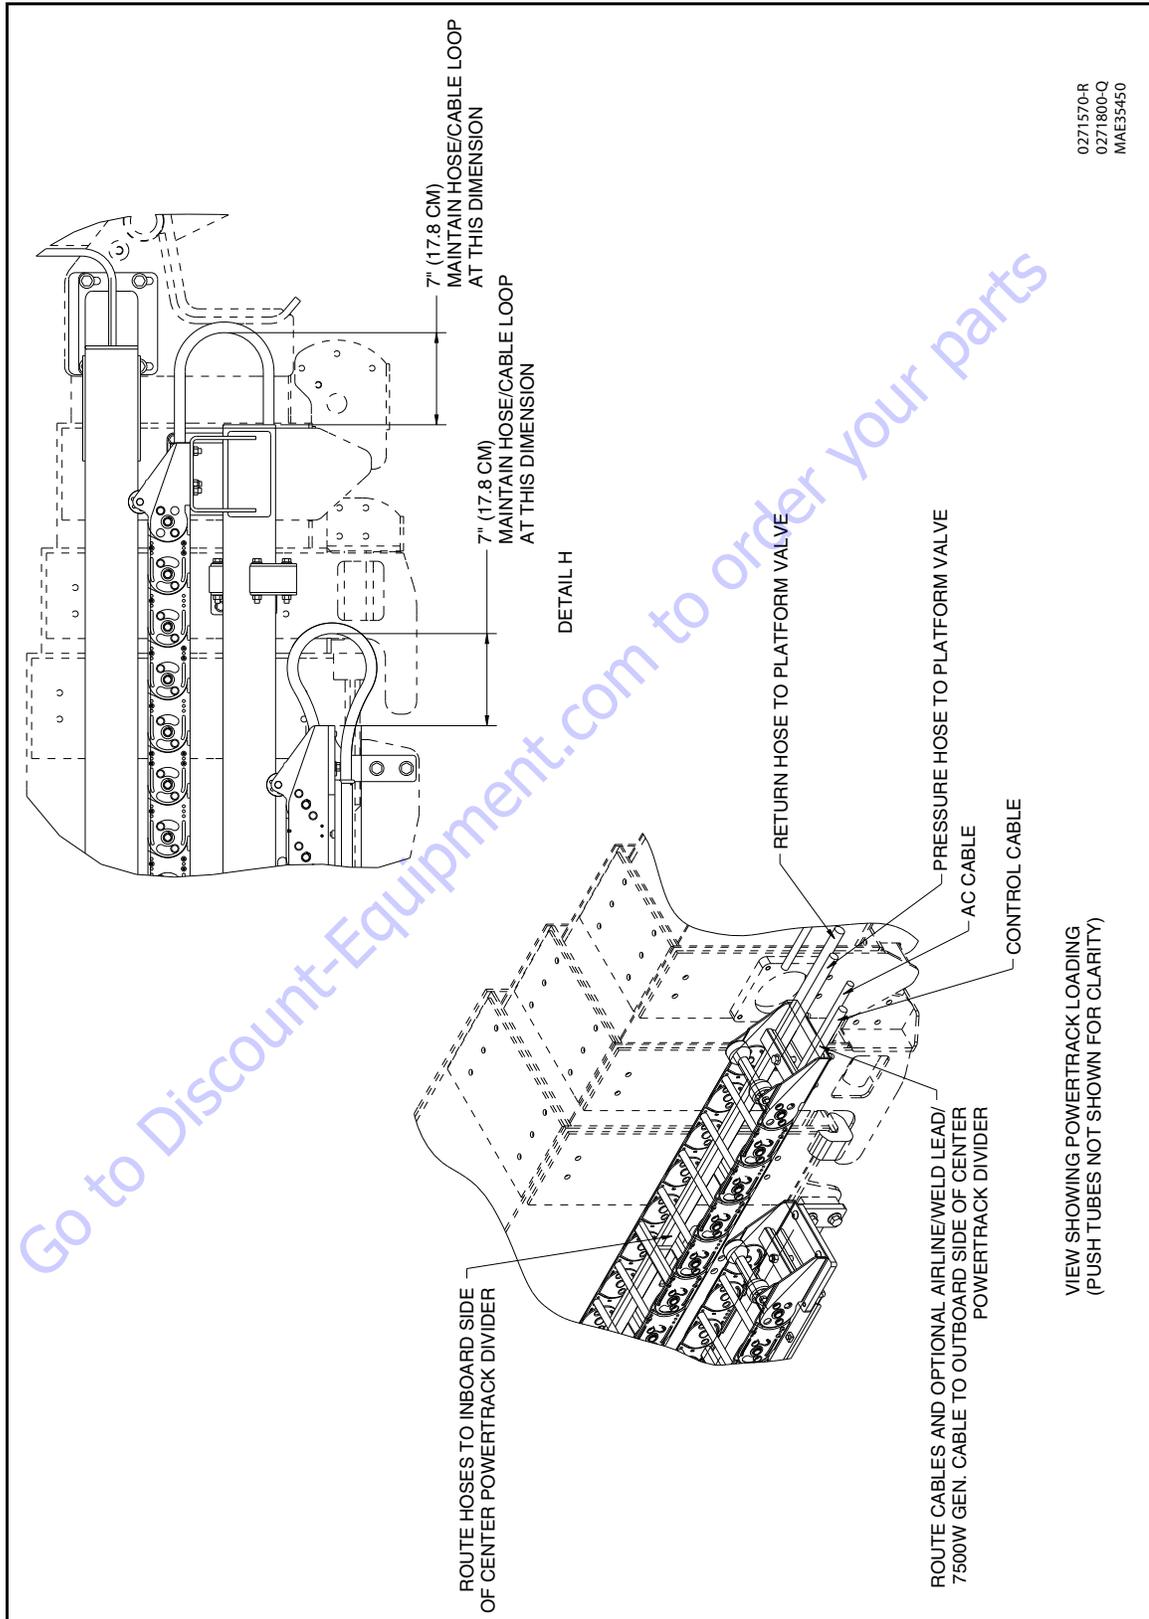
Powertrack Installation - Sheet 6 of 6
